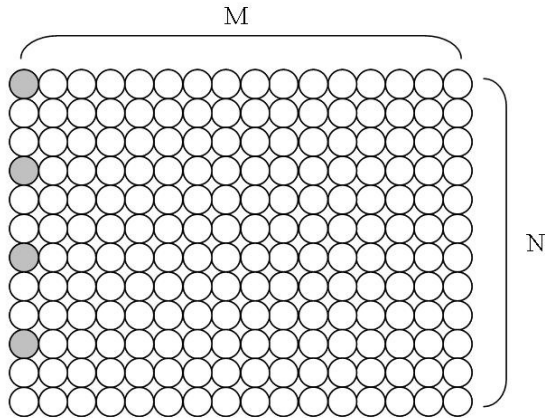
Assembly of sectional flexible dies and die housing equipment
